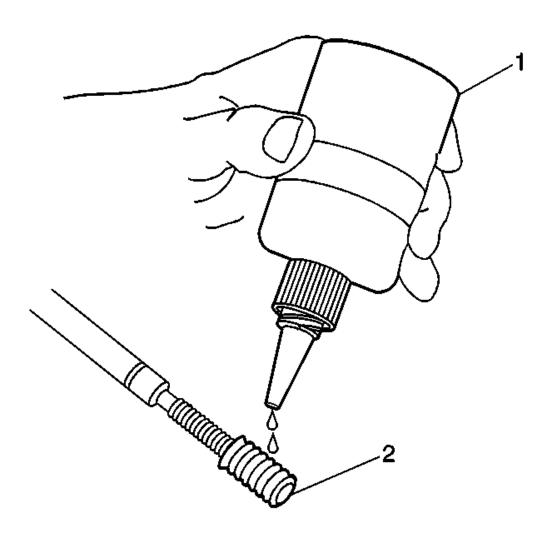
Applying Threadlock To Insert Courtesy of GENERAL MOTORS COMPANY
